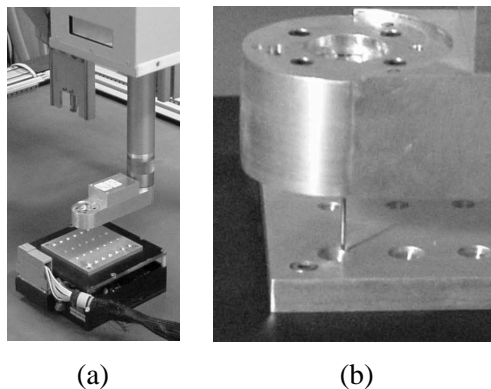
(a) View of courier, configured for an insertion task, coordinating with an overhead manipulator. (b) Close up view of the manipulator's end effector preparing to insert a peg into a hole with an exaggerated chamfer.
